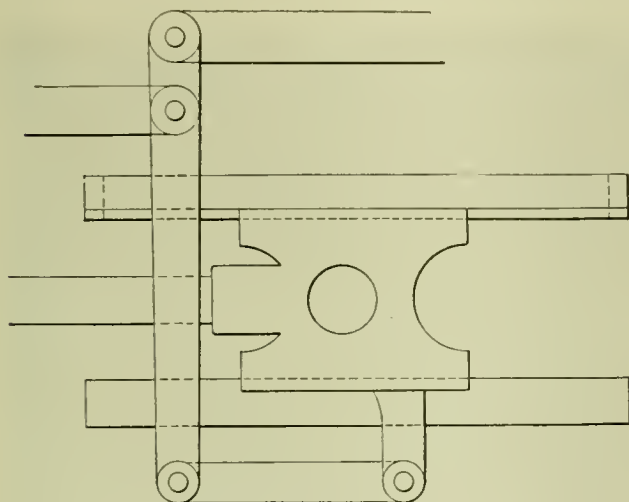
Positions of Parts With Crosshead and Radius Bar on Center
